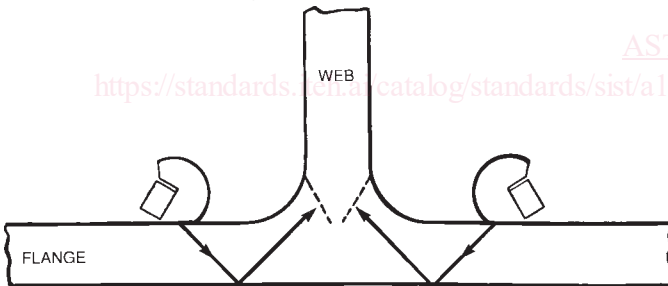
(b) Alternative Technique 7, for Searching T-Welds for Discontinuities
